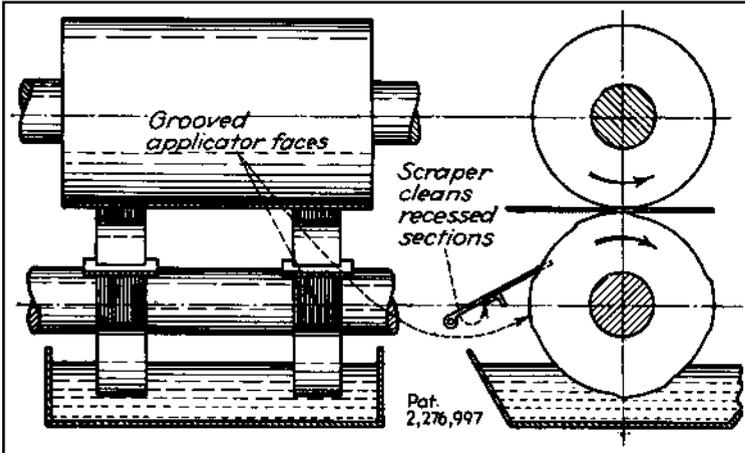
An adhesive pattern produced by raised faces on the applicator roll.
